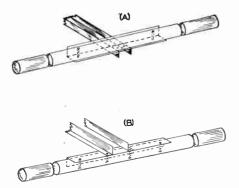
Detail sketches showing method of mounting elements in the dual array for 28 and 50 Mc. A — The 50-Mc. boom is comprised of two pieces of angle stock mounted edge-to-edge to form a channel. The elements are fastened to the boom by means of a cradle, also of angle stock. B — In the 10-meter array, the two portions of the boom are separated, and mount on either side of the vertical support. The elements and their supporting crossarms are attached to the lower surface of the boom. be built, using the same general dimensions, except that the unbroken section of the folded dipole, in this case, should have a ³/₄-inch diameter element in place of the 1-inch tubing used in the 4-element array.
